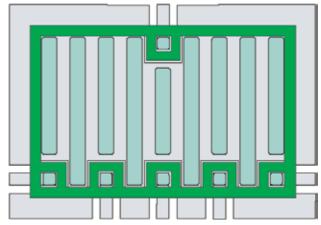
Solder Stencil Overlaid on ACFM-7102 Bottom Metal Pattern.
